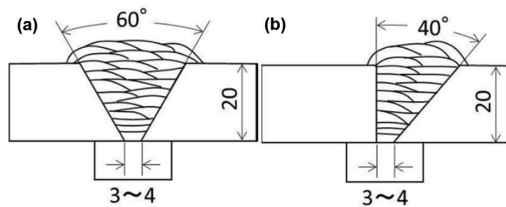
Schematic illustration of TIG welded joint bevel shapes and fused depositions
